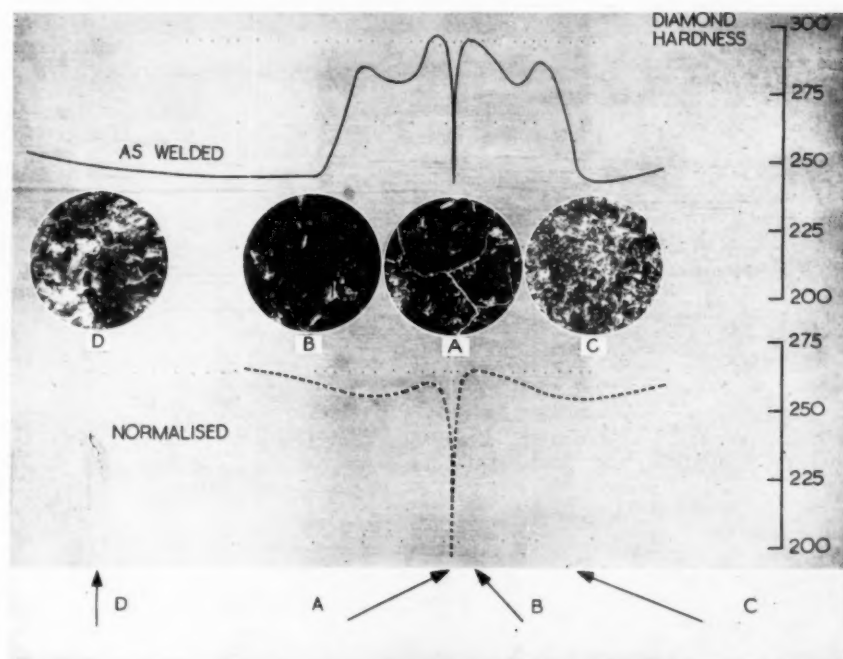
Hardness exploration and structure of flashbutt-welded rail.
